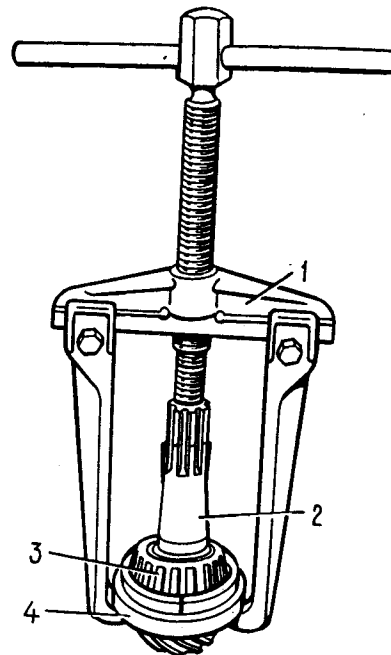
Removing Drive Pinion Rear Bearing Inner Cone with General-Purpose Remover Tool A.40005/1/7:
